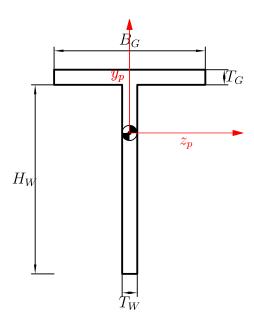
T: Cross section dimensions in a Poseidon T profile section.
